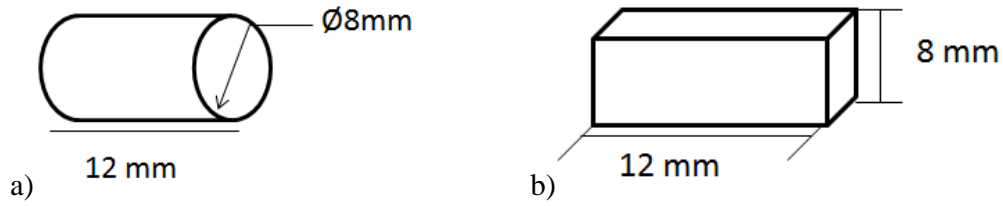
Hot compression samples: (a) cylindrical, and (b) rectangular.
